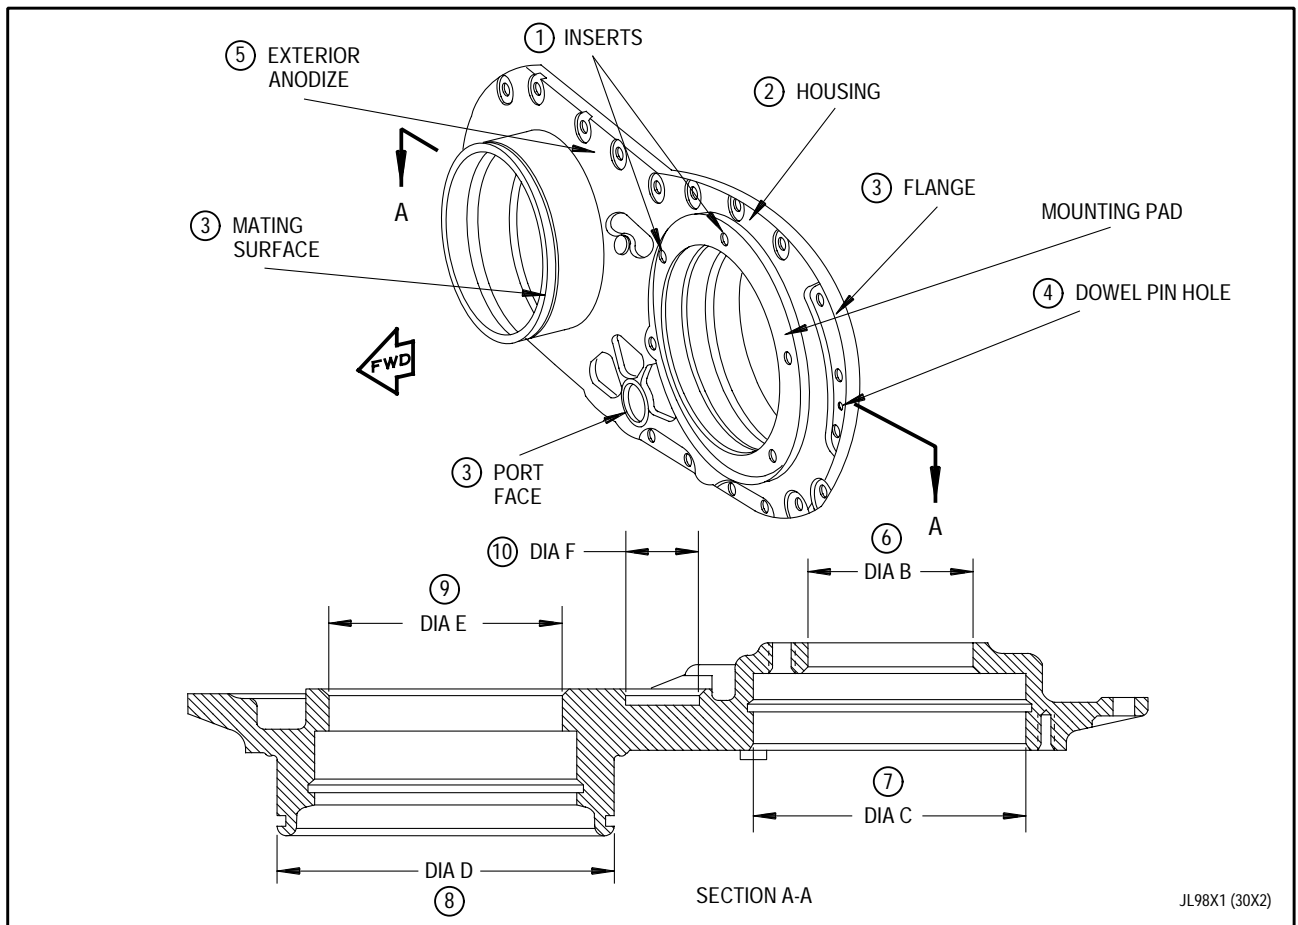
Gearbox (Front) Housing Assembly - Inspection
